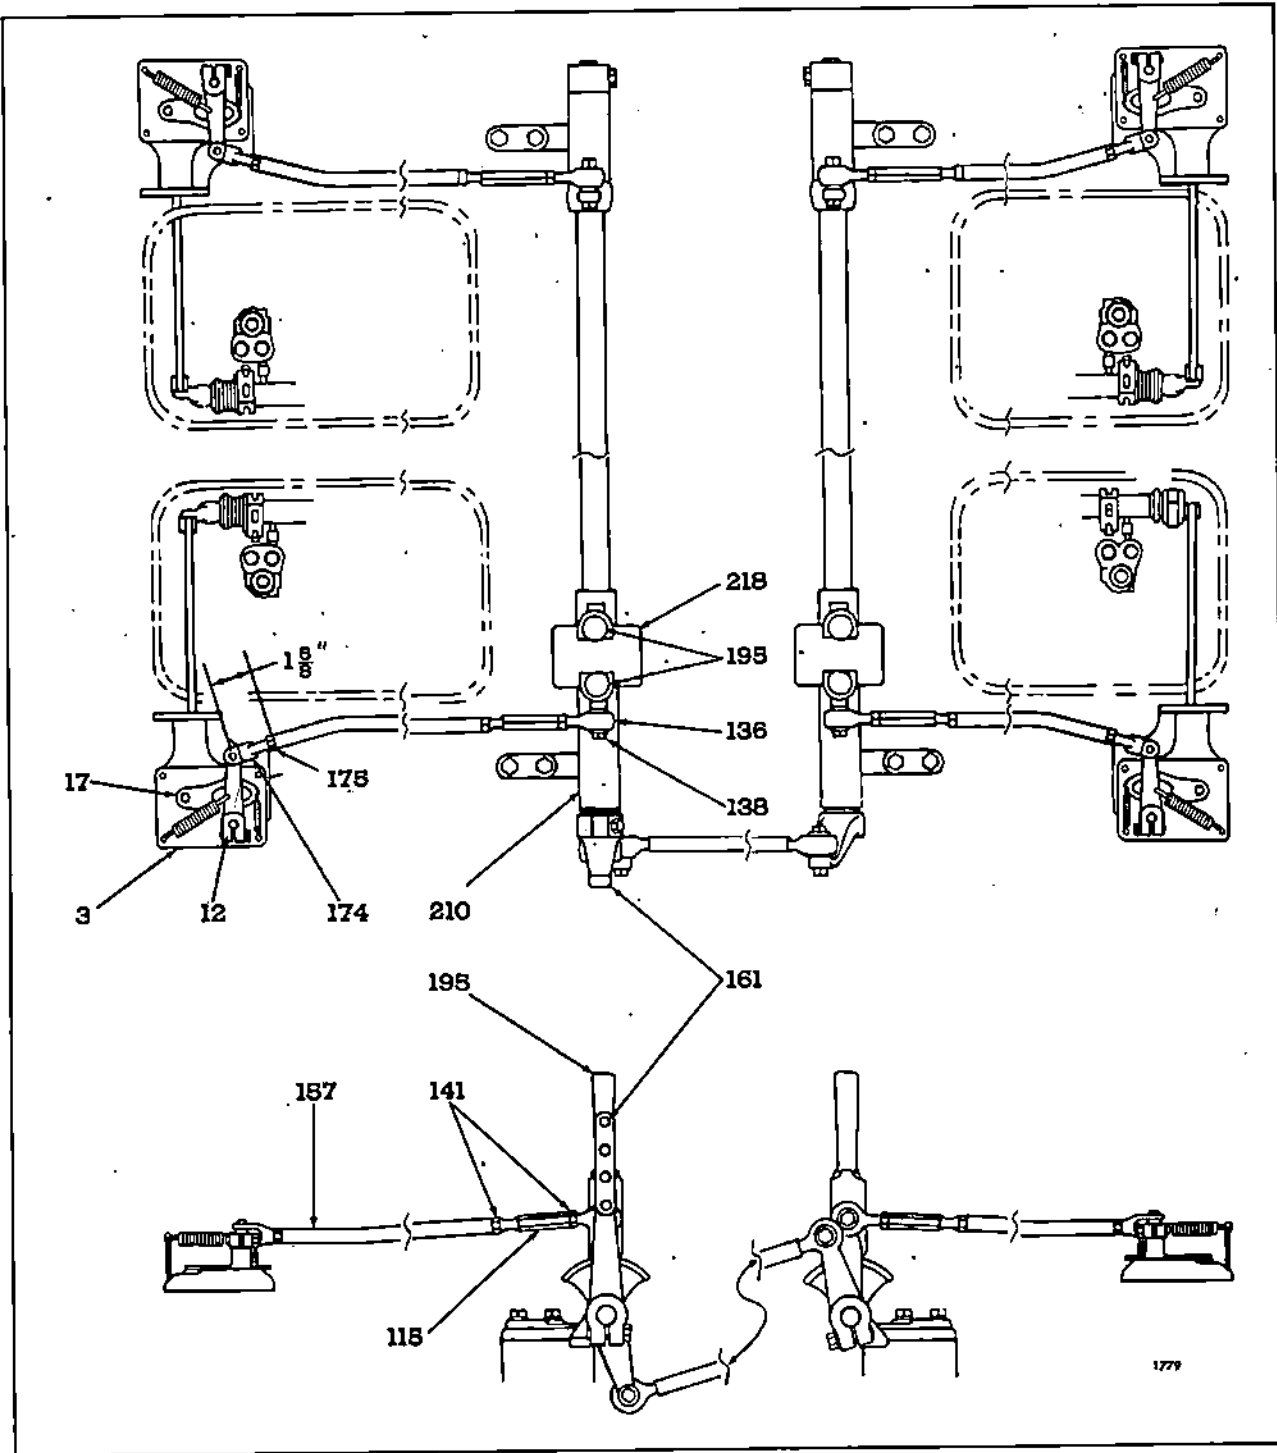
Diagram of Throttle Control Linkage for Quad Units With Limiting Speed Mechanical Governors
